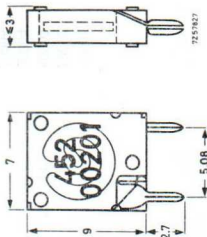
Version for printed-wiring boards with holes of 0.8 mm
